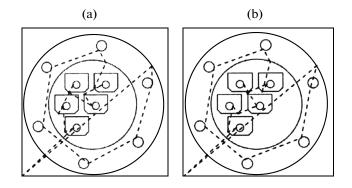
CT paths for the machines of (a) waterjet and (b) laser cutting.
